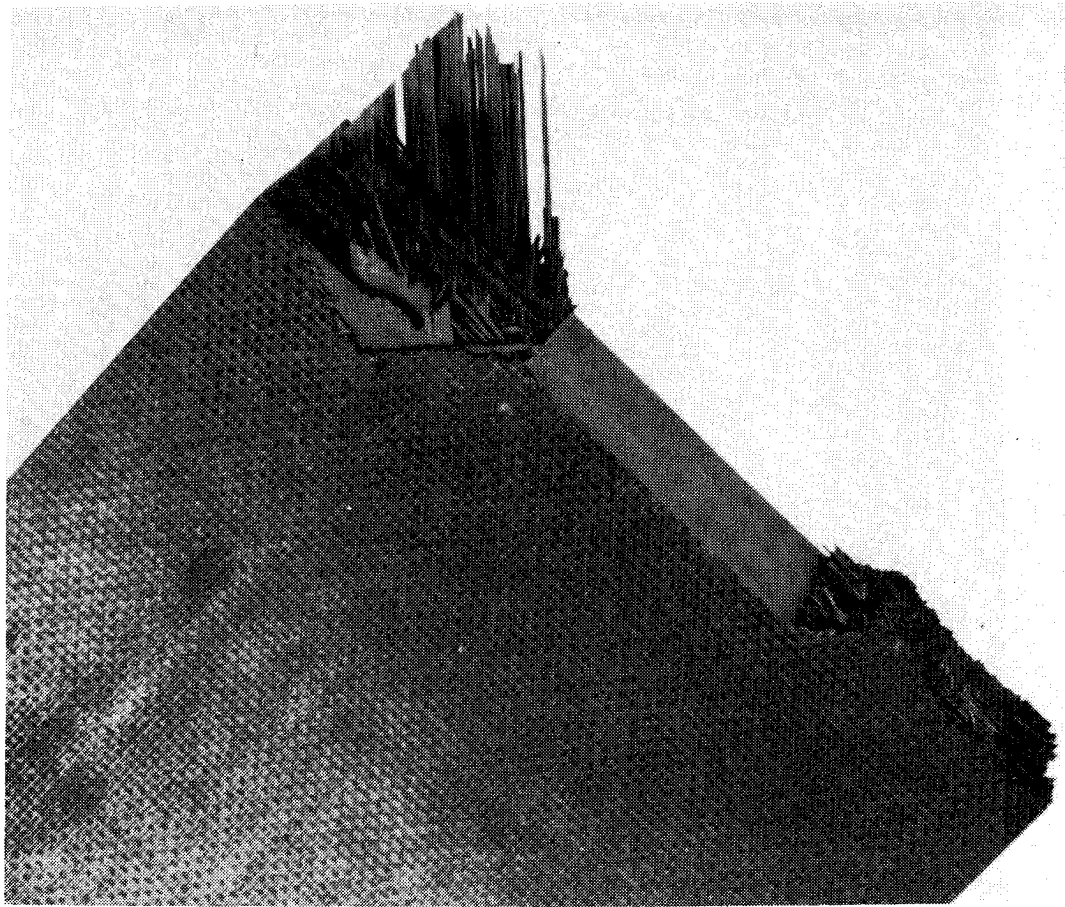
Photographs of the Final Fracture Surface
